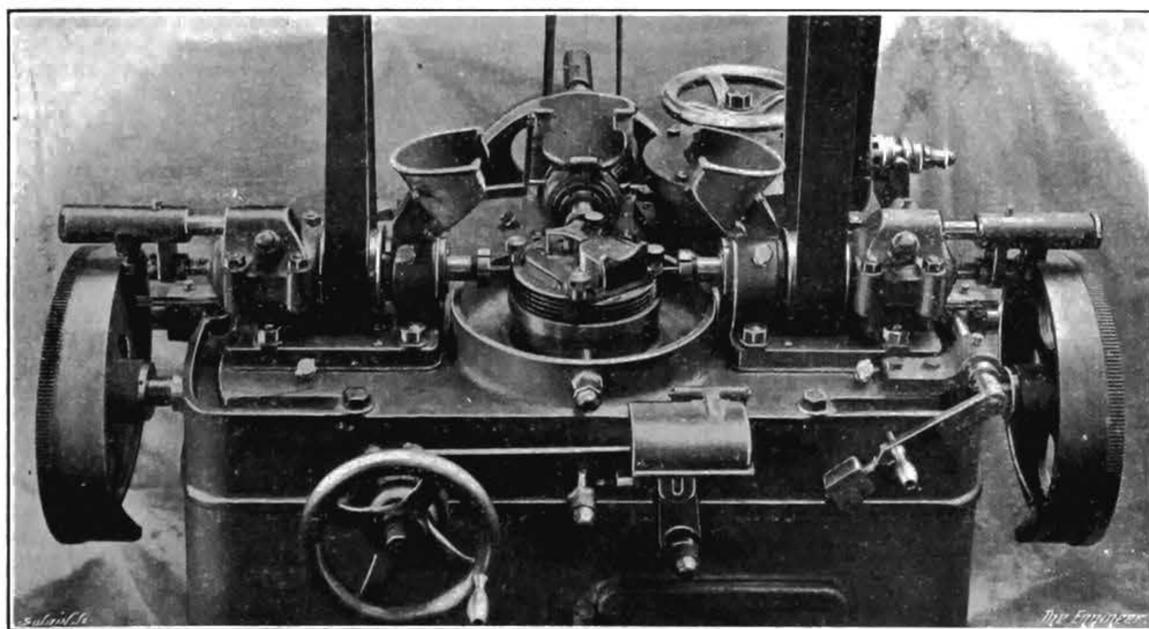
THREE-SPINDLE MACHINE FOR MILLING CYLINDER HEADS FOR AERO-ENGINES
